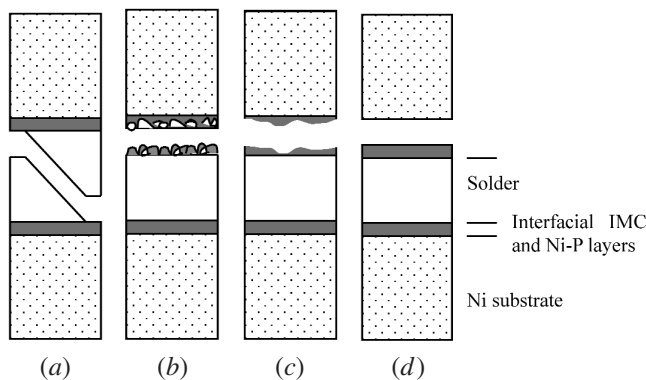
Schematic plot of the fracture surface in thermally aged Sn-3.5Ag/Ni-P specimens. (a) Mode I: ductile failure inside bulk solder, (b) mode II: dimpled interface failure between solder and Ni_3Sn_4 IMC, (c) mode III: failure through interfacial layers (Ni_3Sn_4 , Ni-Sn-P and Ni_3P), and (d) mode IV: failure between Ni-P coating and Ni substrate.
